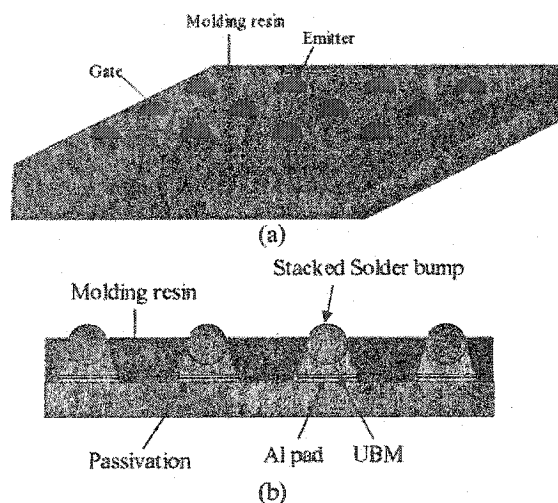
(a) The structure and (b) the cross sectional view of D²BGA chip-scale packaged power device (after CPES, Virginia Tech (Liu and Lu 2001))
